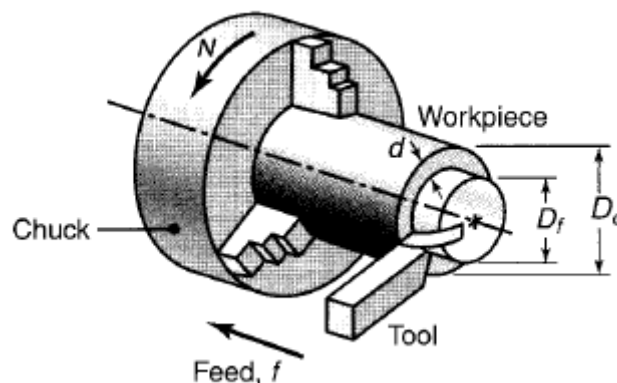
Basic working setup of a single point cutting process – rotary workpiece chip removal (modified after Kalpakjian & Schmid, 2006)
